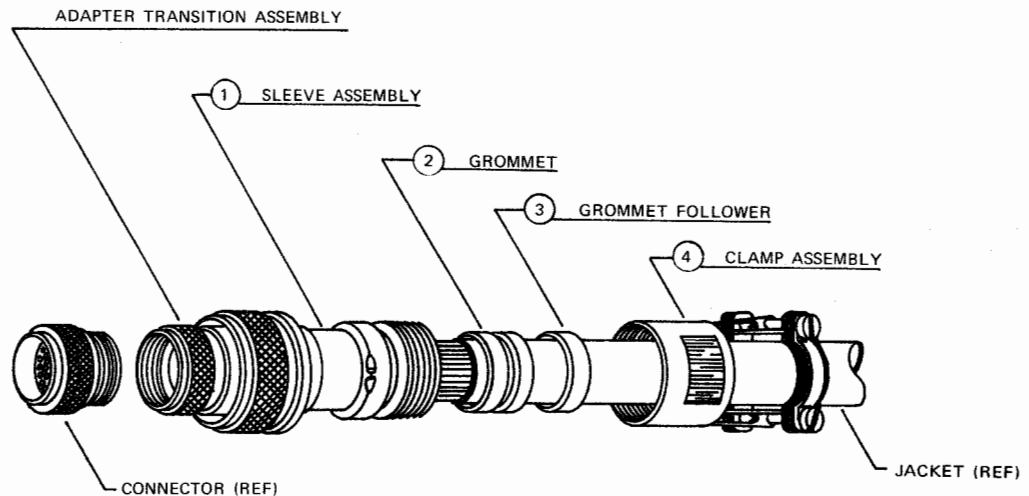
Style 2 - Type B Environmental Backshell Assembly Breakdown
